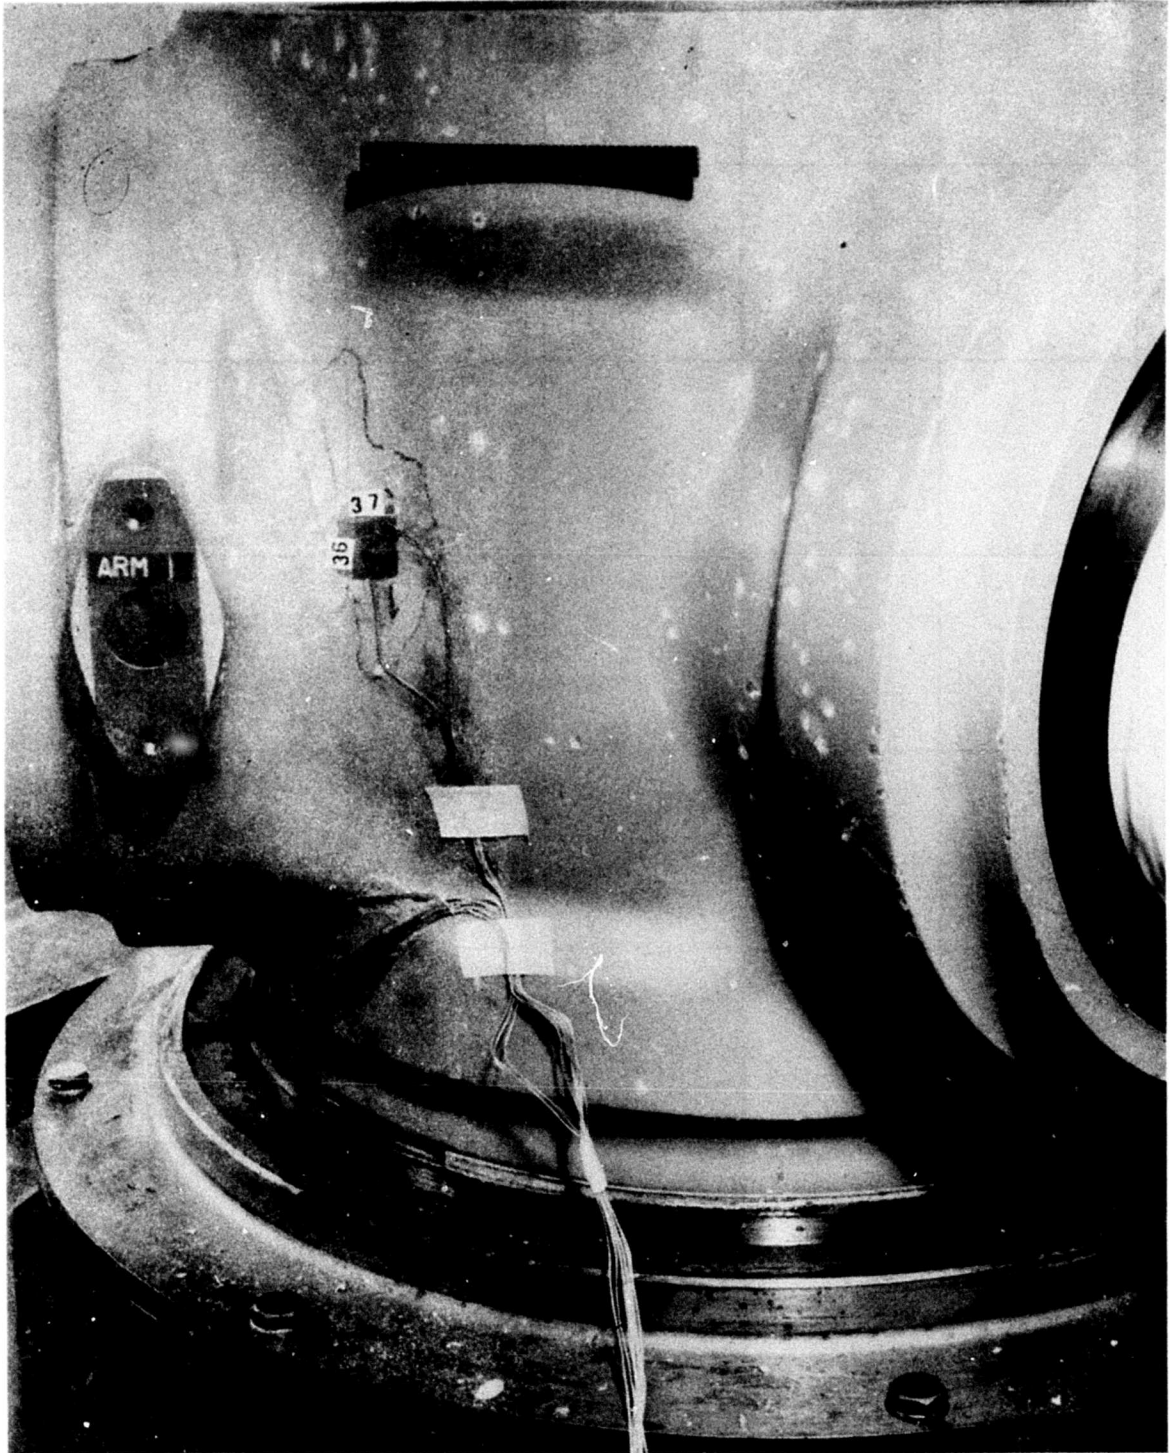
STRAIN-GAGE INSTALLATION, LOCATIONS 36 AND 37
